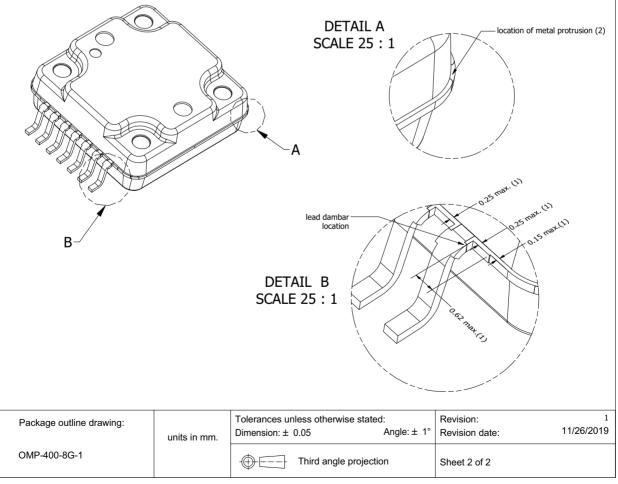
Package outline OMP-400-8G-1 (sheet 2 of 2)
